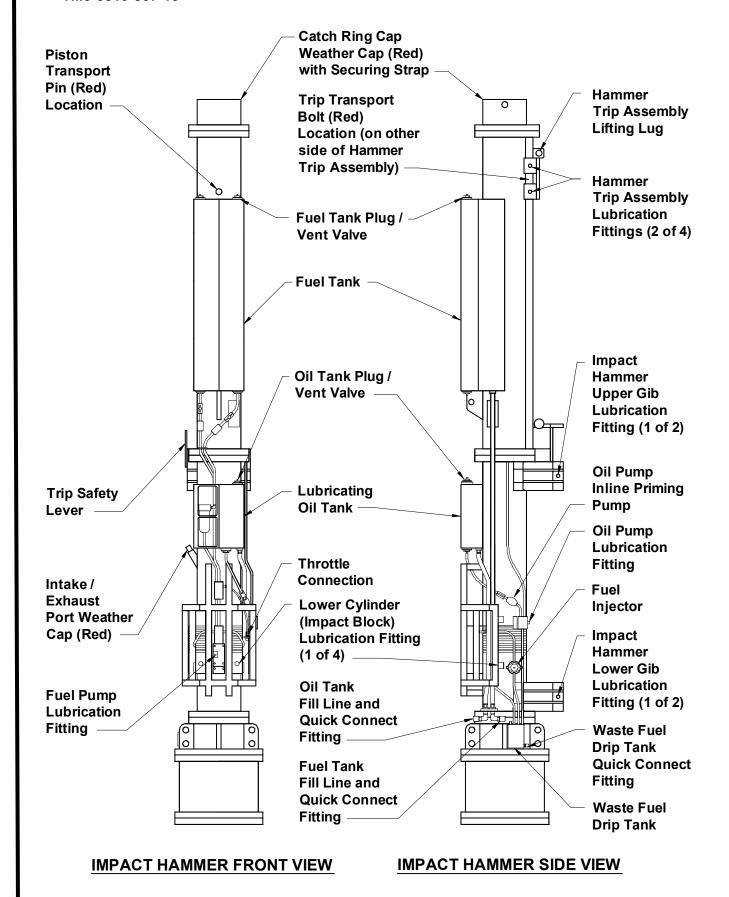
Spotter Slide and Impact Hammer Service Points (Sheet 2 of 2)
